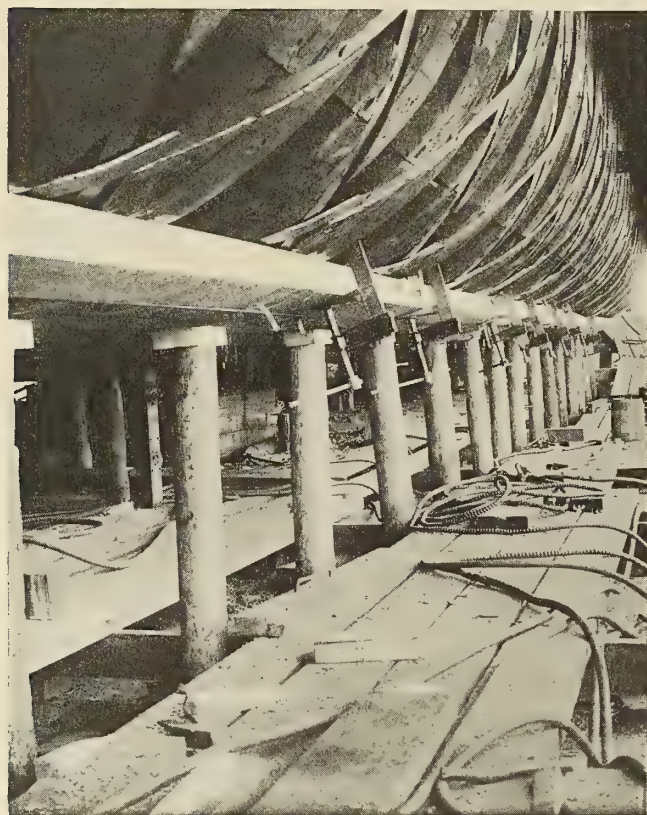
Bilge Construction, Showing Method of Planking. Note Steel Straps Across Frames
